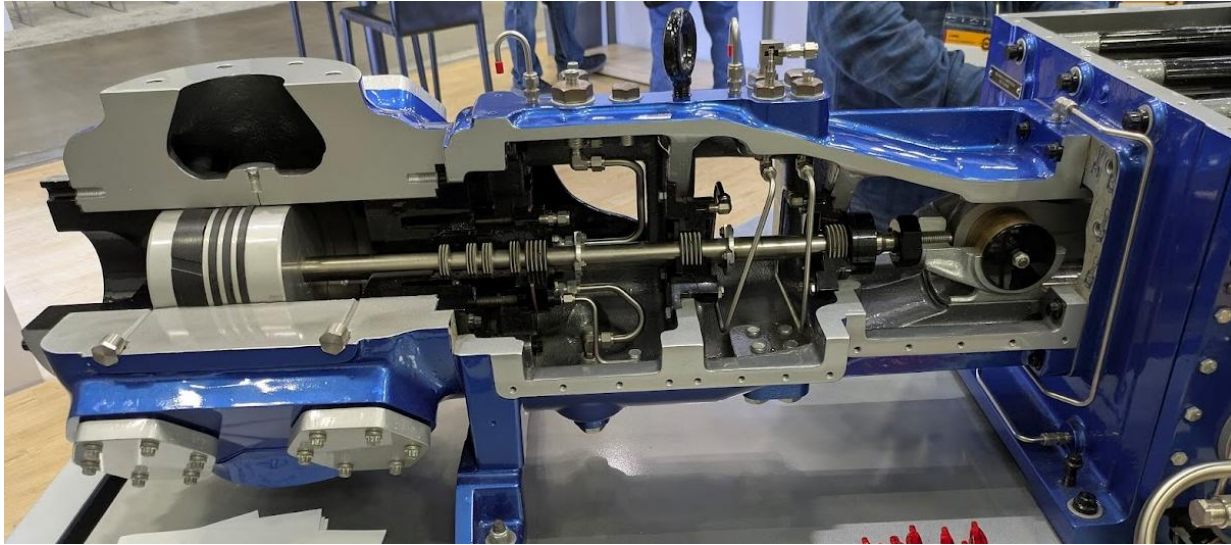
Photo shows a cutaway of a reciprocating natural gas compressor. On the left, the large casting makes up the cylinder, with suction and discharge valves placed on the top and bottom. Within the cylinder is the piston, connected to the piston rod, and then crosshead. The crosshead is attached to a connecting rod, which travels into the crankcase on the right of the image. This compressor includes a purge packing system and extra distance piece compartment to prevent hazardous gas from reaching the crankcase. Photo taken at 2025 Gas Machinery Conference.
